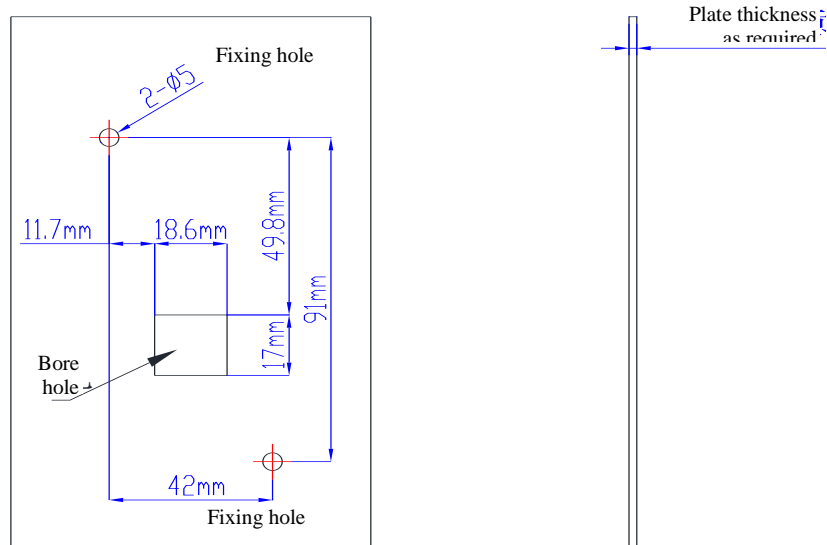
Diagram of dimensions of punching holes on the cabinet door of the external access panel
